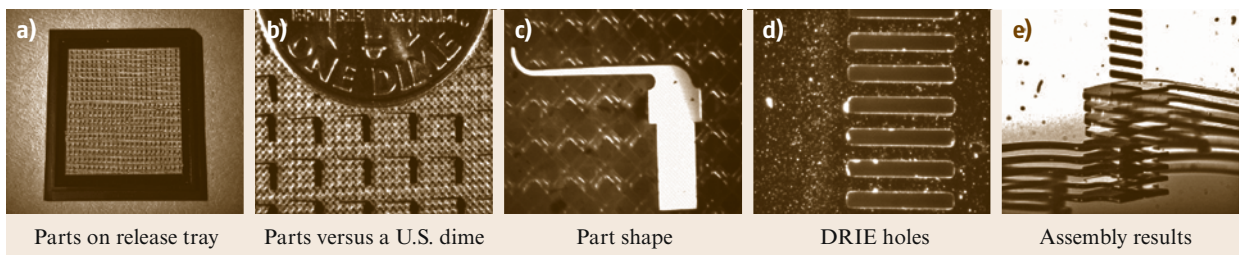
e A 3-D microassembly example (a) Parts on release tray (b) parts versus a US dime (c) part shape (d) DRIE holes (e) assembly results
